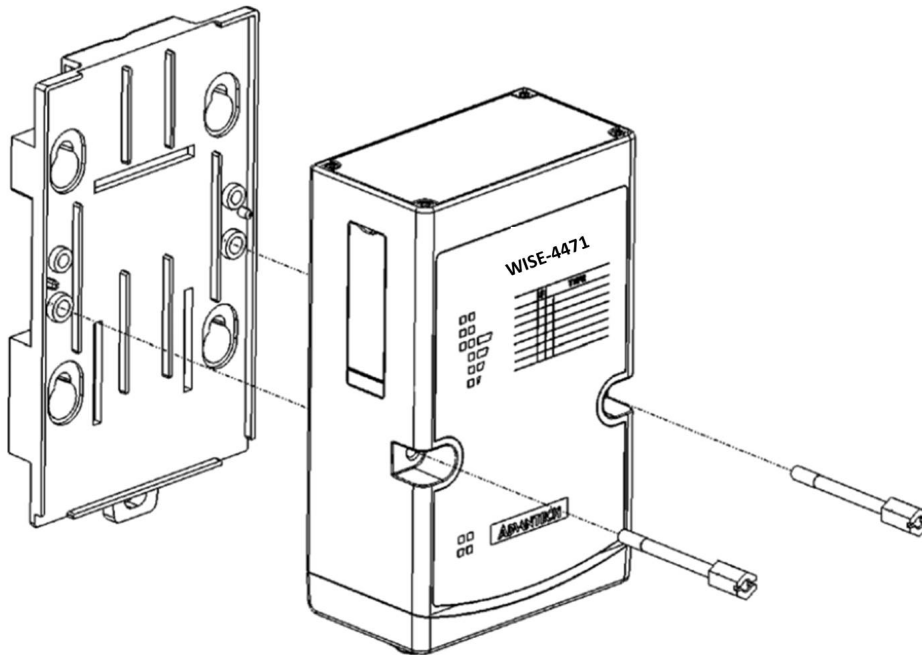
WISE-4471 DIN Rail Mounting Installation
